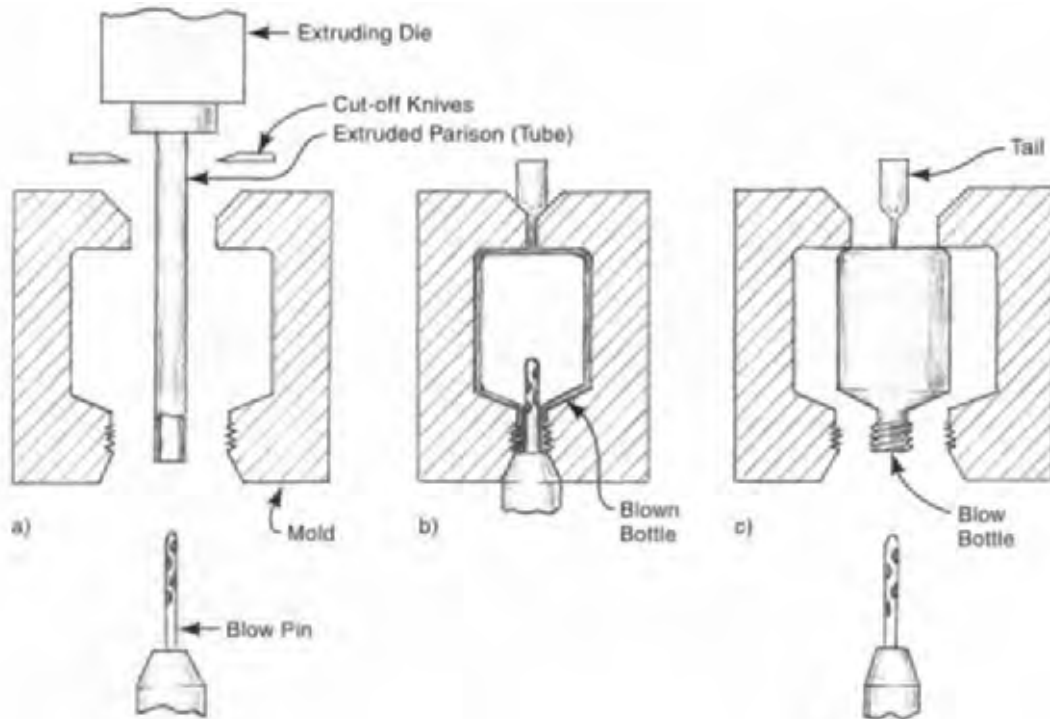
F1 Extrusion blow molding. a) The die is open and the parison tube is extruded between mold halves. b) The tube is cut off as the mold closes and a blow pin is inserted in the other end of the tube. The tube is pinched off at the top (bottom of bottle). The tube is expanded by air pressure to line the interior surface of the mold, forming a bottle. c) The bottle cools and the plastic solidifies. The blow pin retracts and the mold opens.
